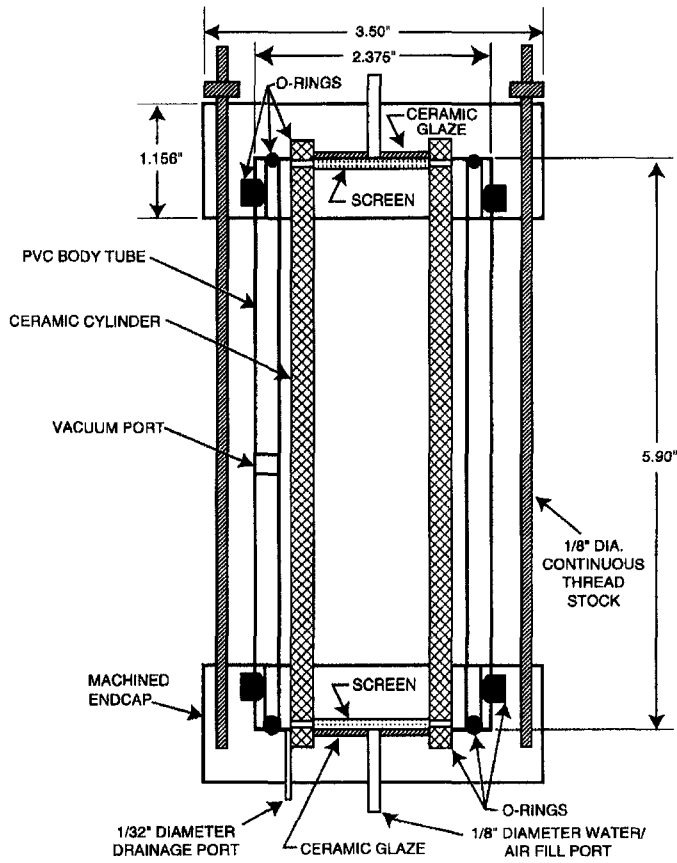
Detailed cross section diagram of the air permeameter instrument.
